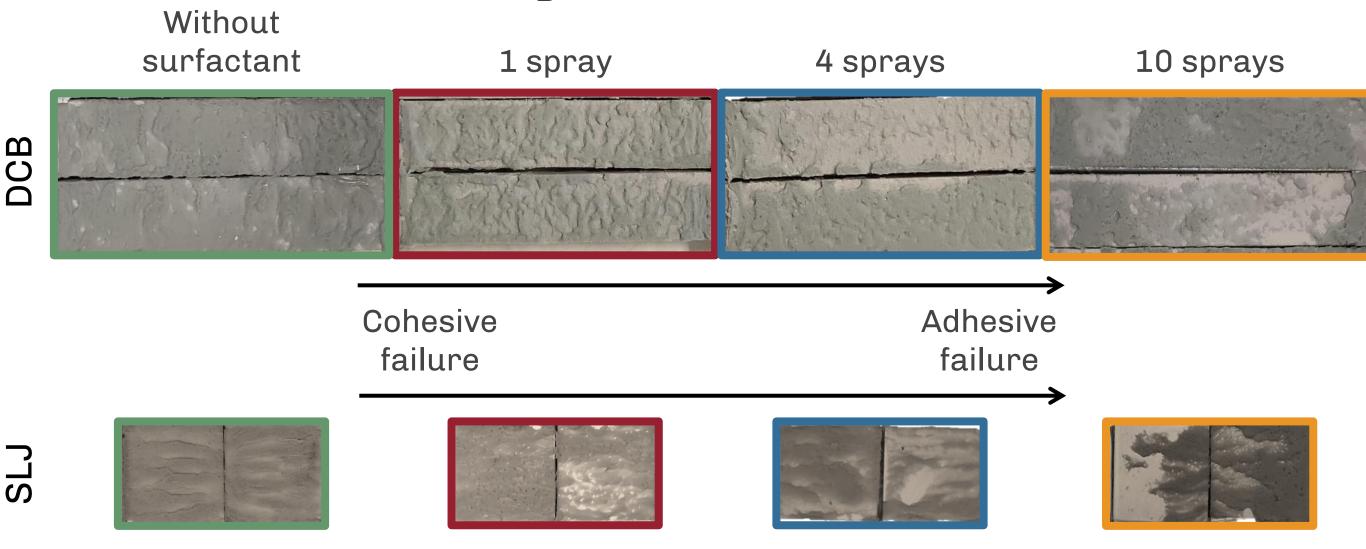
Fracture surfaces for each contaminant level tested, for SLJ and DCB.
